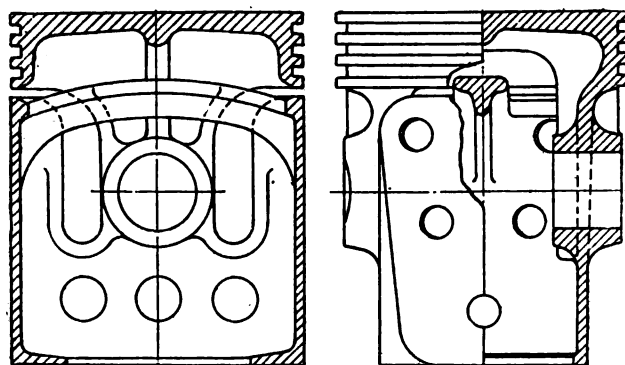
Type of constant clearance aluminum piston with steel strut cast integrally with slipper portion
